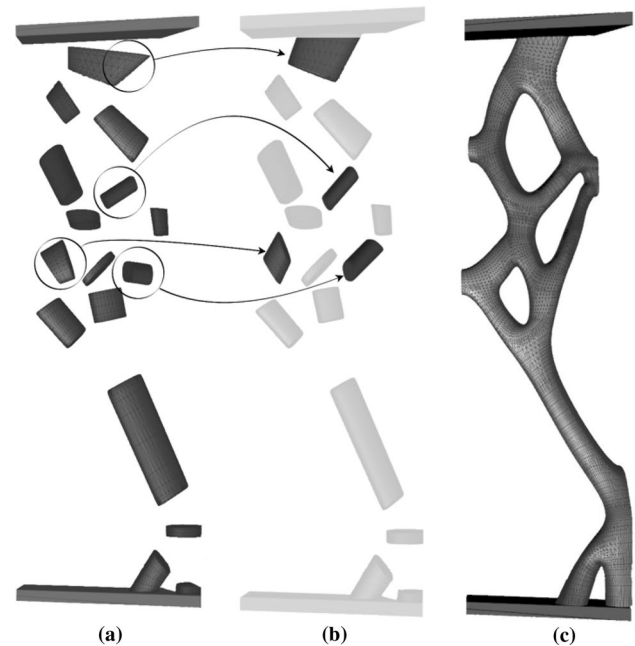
a CAD model from automatic reconstruction; b Close-up on facet displacement; c Close-up on modified surface example
